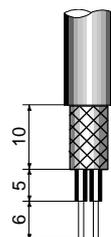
Removing insulation from the bus cable (dimensions in mm)
